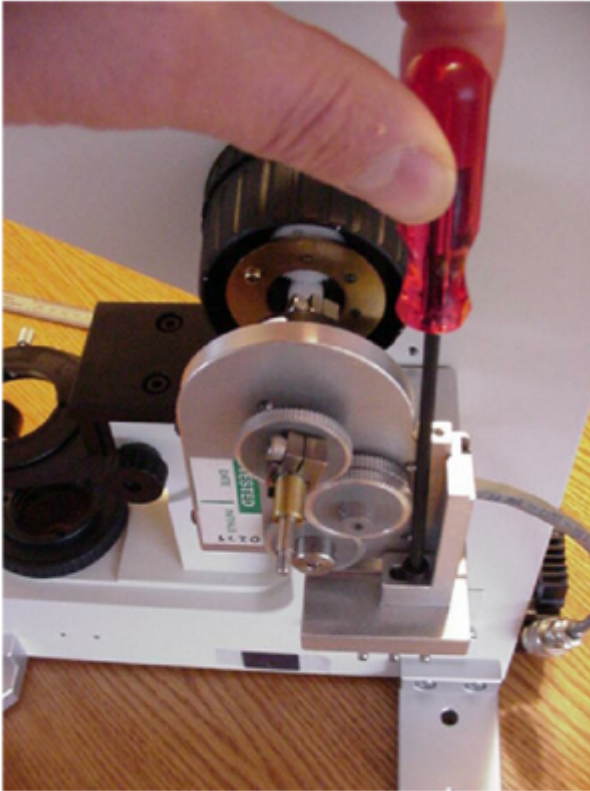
Secure, but Do Not tighten , horizontal adjustment screw to hold drive in
